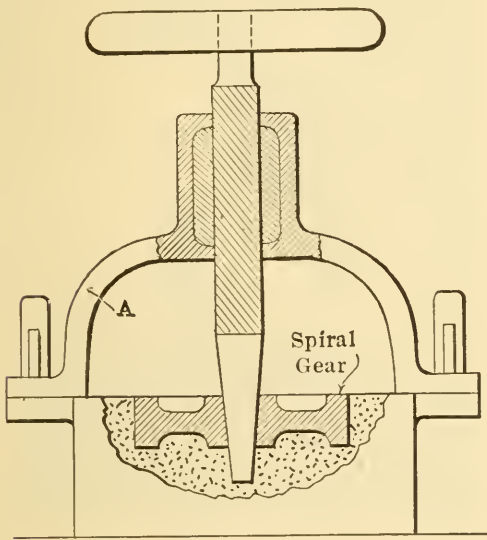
RIG FOR DRAWING A SPIRAL GEAR PATTERN.
